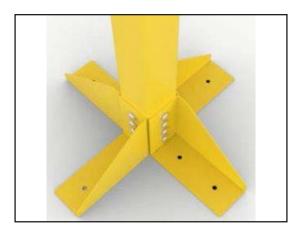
Pre-Drilled Holes for Bolting the Bast to the Floor
